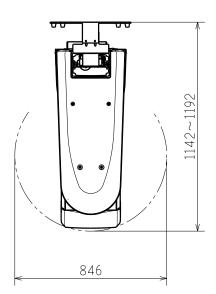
3: Standing position wall-mount long type: Panoramic type
